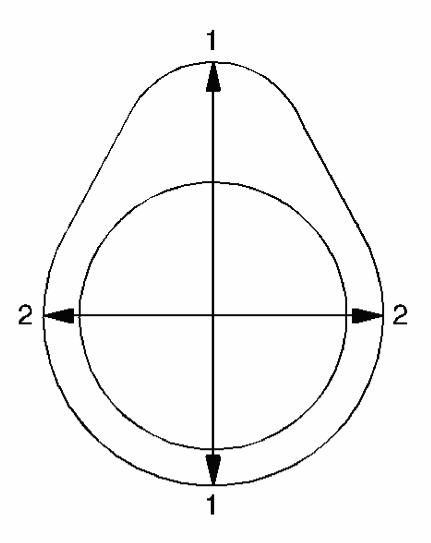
Identifying Base Circle Courtesy of GENERAL MOTORS CORP.
